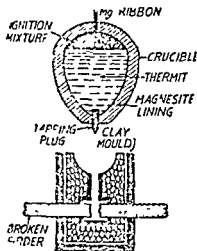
'5—Thermit welding of two broken parts of a girder.
